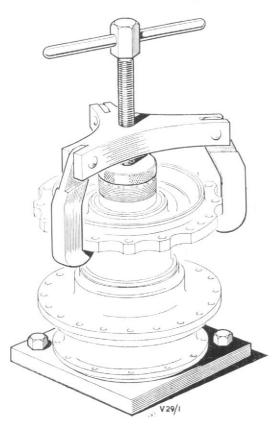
Using bench fixture T.75716, adapter T.73067, and extractor T.73068 to separate the hub shaft from the extension shaft.
